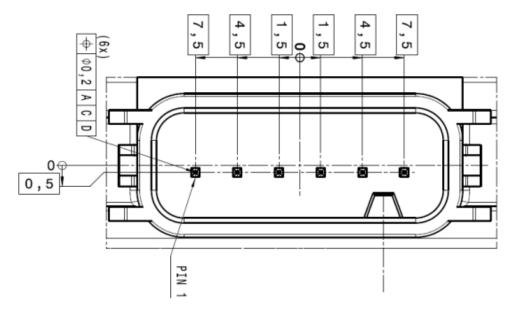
Drawing frontal view of the vehicle connector ARS 404-21
